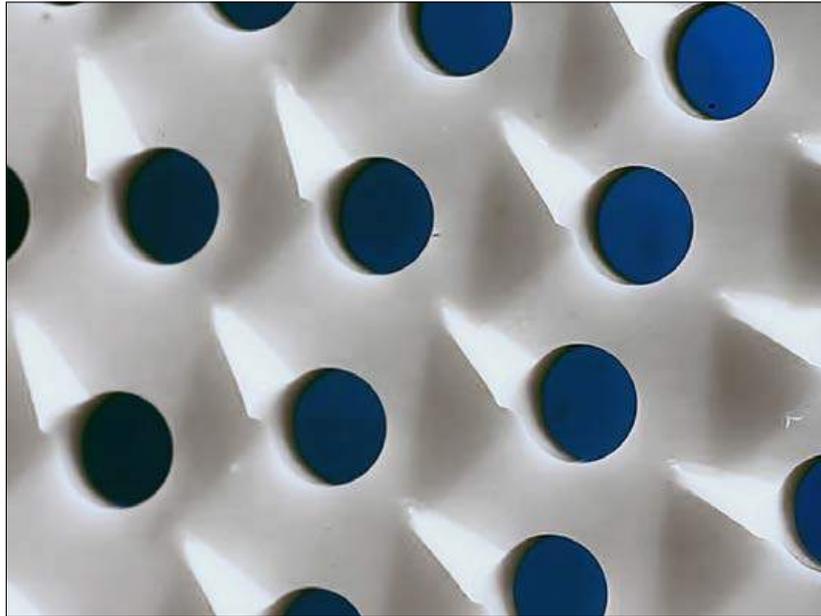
Detail of an aluminium oxide disc formed by Powder Injection Moulding
